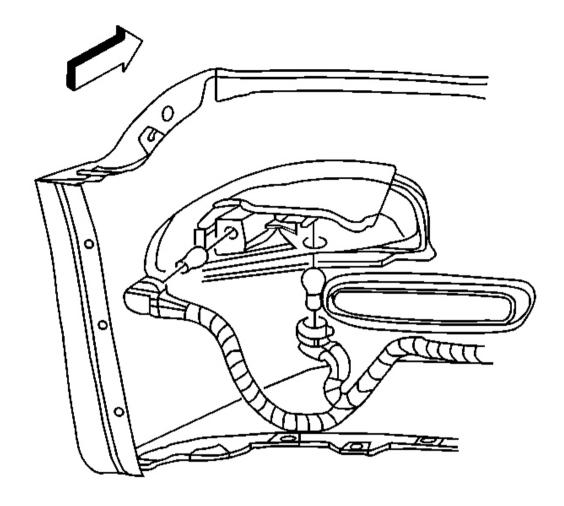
Sockets To Lamp Courtesy of GENERAL MOTORS CORP.
